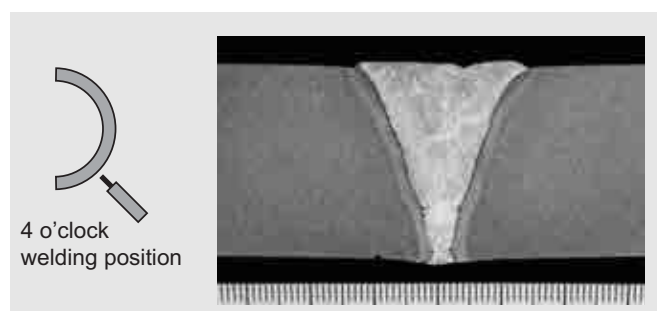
Macrostructure of 4 o'clock position weld bead
